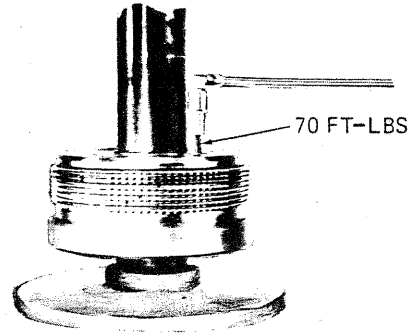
REASSEMBLY OF CLUTCH ASSEMBLY, POWER CONTROLLED WINCH (Sheet 1 of 2)
